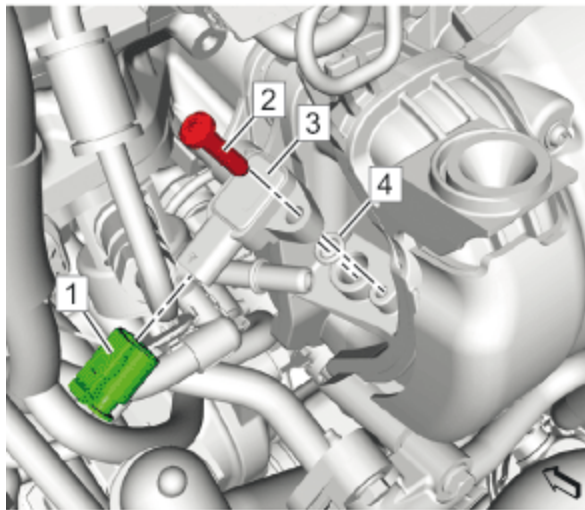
Manifold Absolute Pressure Sensor, Electrical Connector, Bolt And Seal Ring
